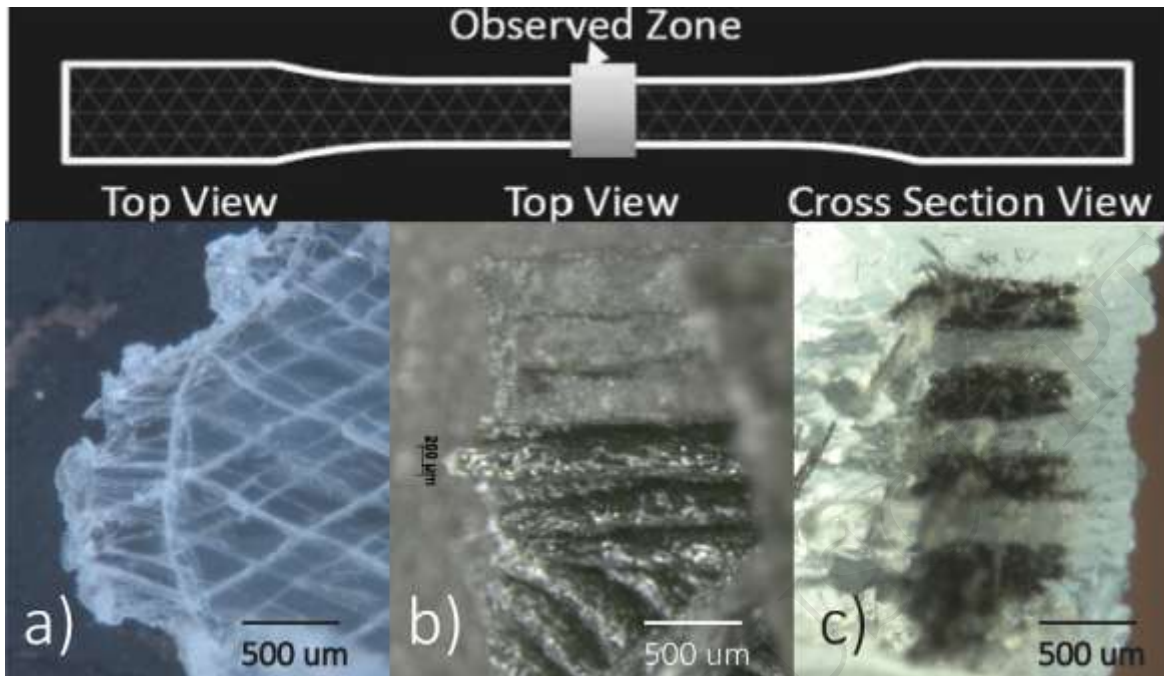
Close-up view of failure mechanism of a) Nylon specimen; b) Onyx sample c) CFR specimen.
